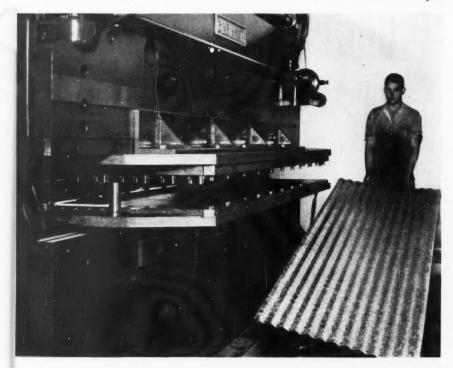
Forming corrugated sheets on a press brake. (Illustration Courtesy The Cincinnati Shaper Company)
